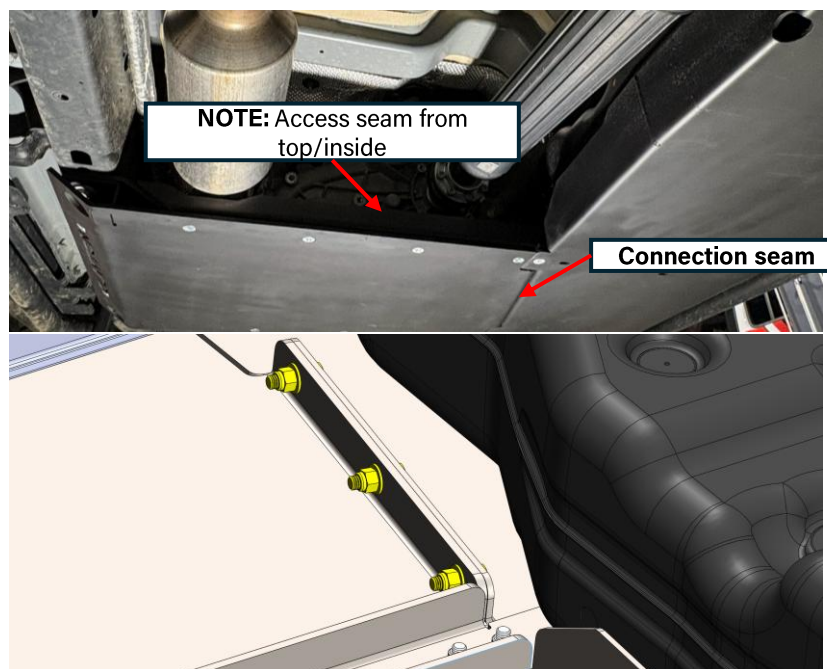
Connection seam to be bolted together using x3 3/8"-16 bolts
